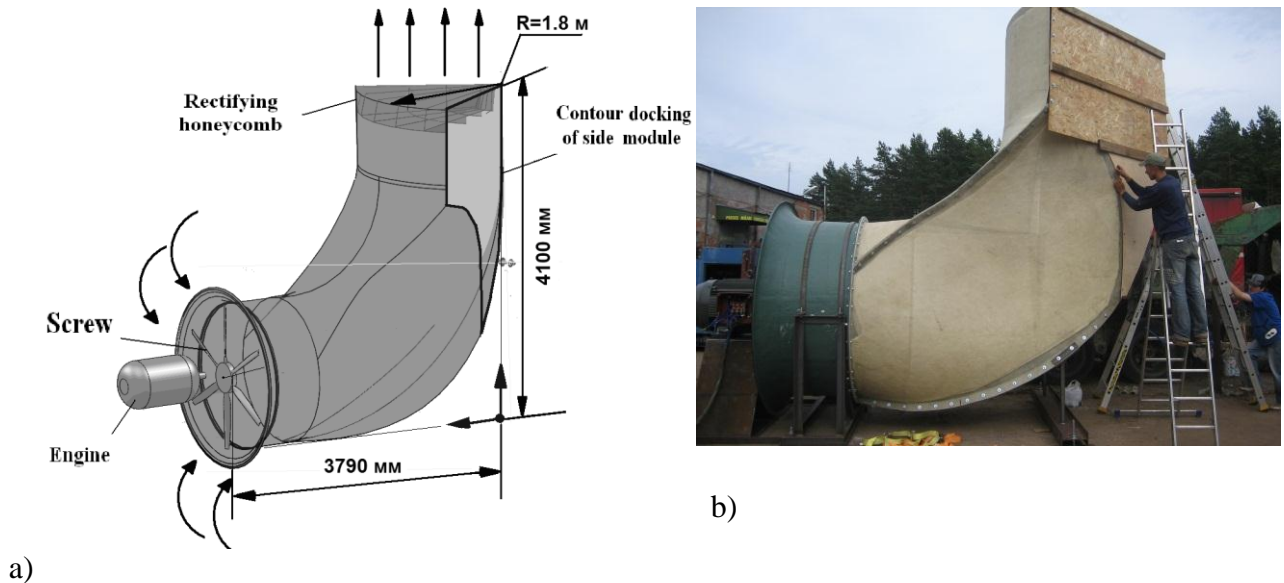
module of wind tunnel with a fan and motor, a) - computer model, b) –natural tunnel
